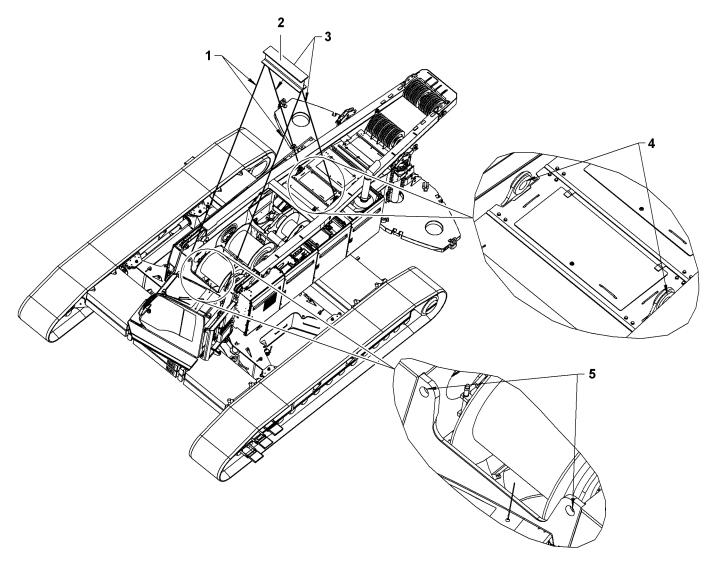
Loading the basic machine with crawler side frame, carbody counterweight and rear counterweight - lifting points
